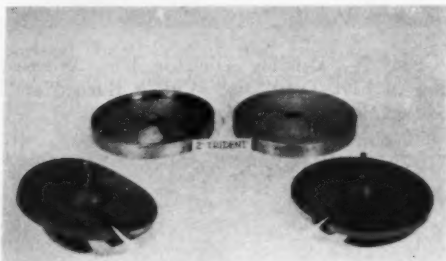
Molding Die for 2-in. Trident Flat Type Disc With a Burned and a Remolded Disc
